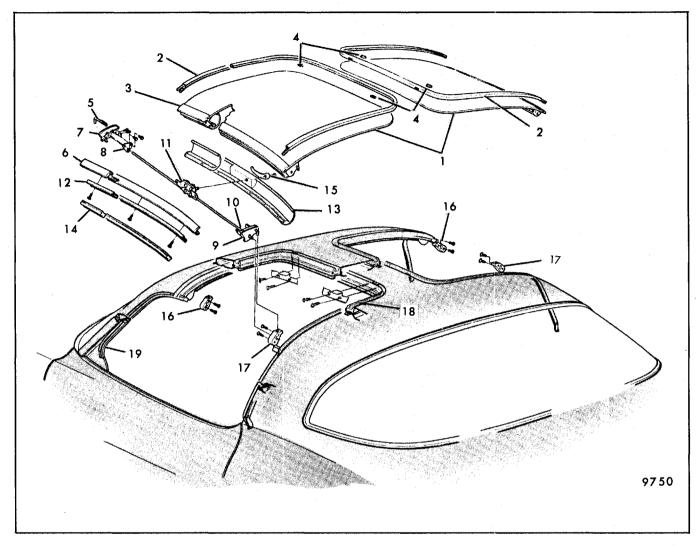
F Hatch Roof - Lift-off Panel Assembly (Exploded)
